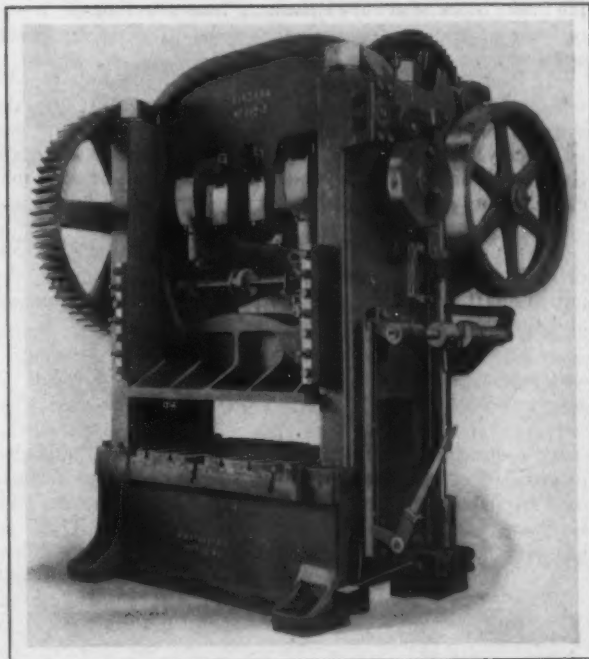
Front View of a New Large Double Crank Press Built by the Niagara Machine & Tool Works, Buffalo, N. Y.
